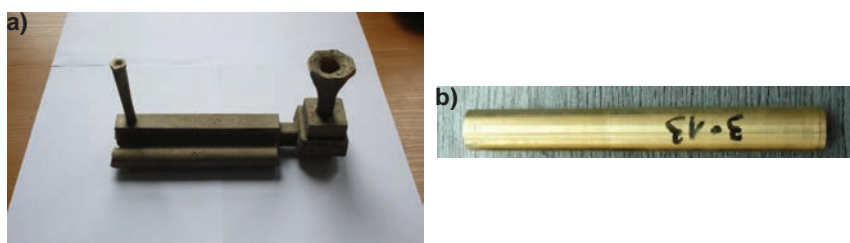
General view of sample: a) in raw state, and b) after rough machining
